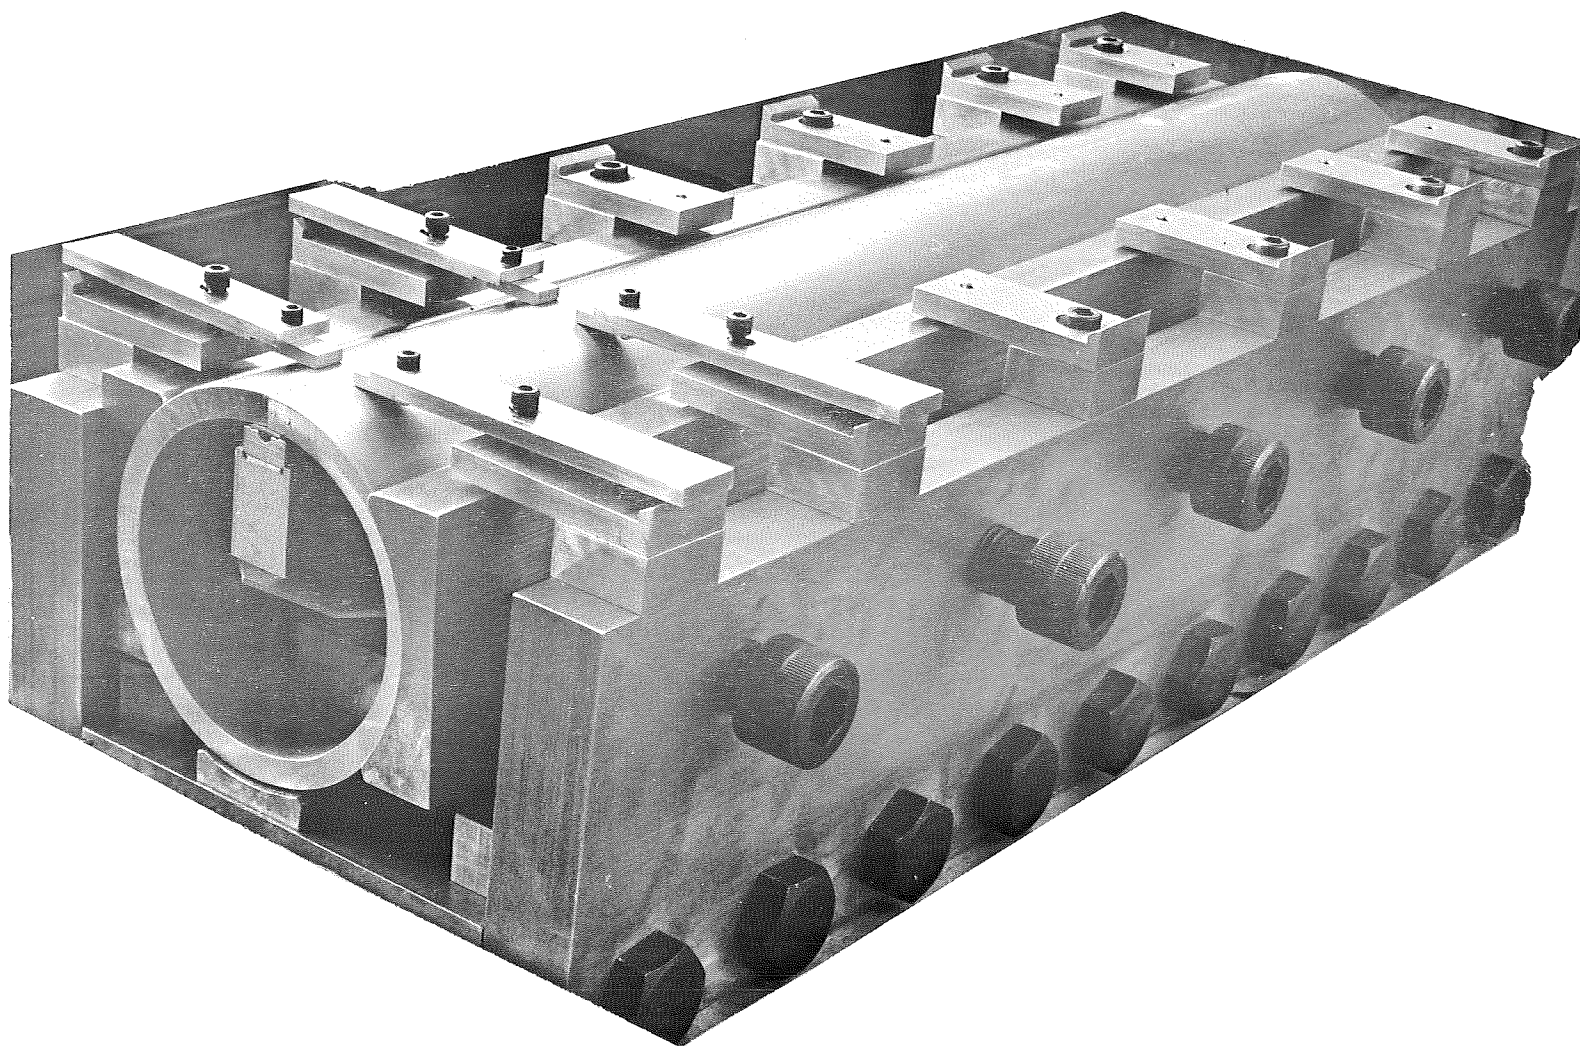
Tube Shell Weld Clamping Fixture
